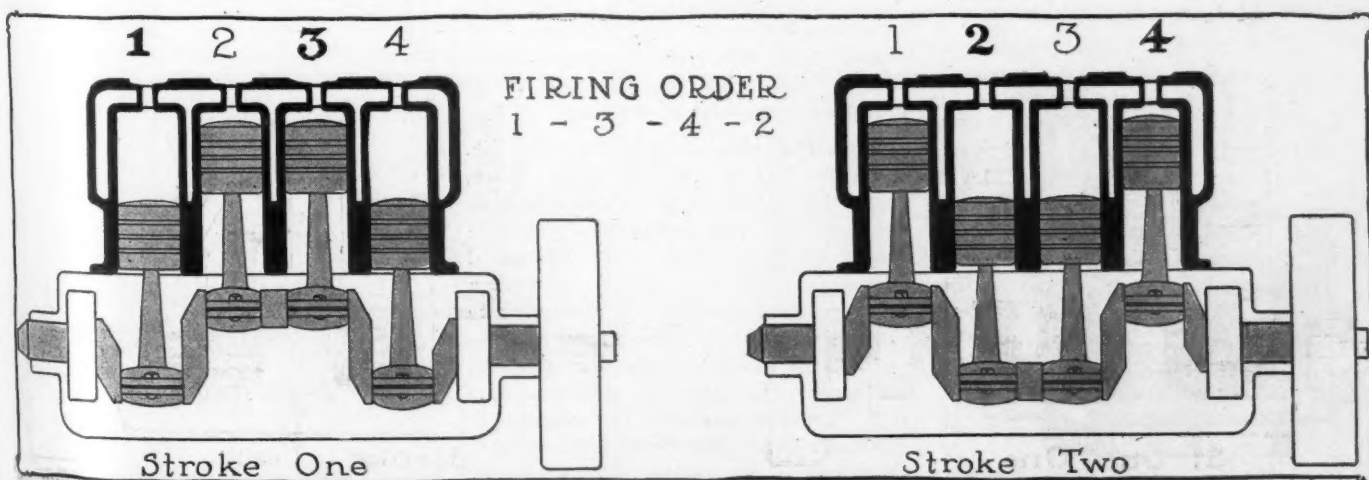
HOW STANDARD CRANK-SETTING DISTRIBUTES PISTON THRUST TO BALANCE MOTOR
